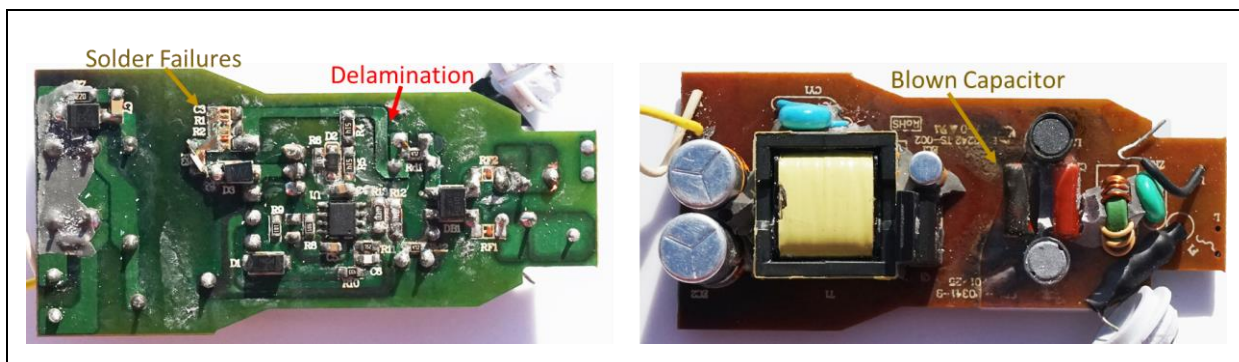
DUT 401, an MULTI-H2 driver, post-8,000 hrs of aging in 6590 underwent solder failures of three components, delamination and discoloration of the PCB and its conductive track (left), and an EMI capacitor blew (right).
